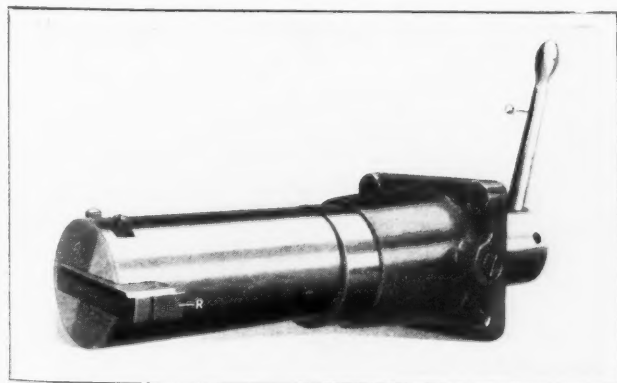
Eccentric Tool employed for chasing the Threads to receive the Seat Ring
